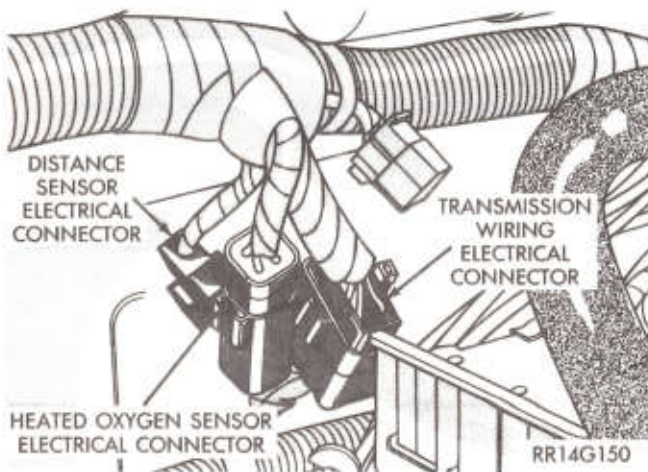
Heated Oxygen Sensor Electrical Connection 5.2L Engine
